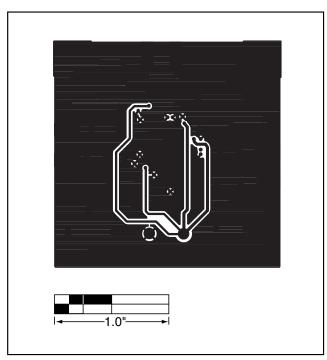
MAX9989/MAX9990 EV Kit PC Board Layout—Inner Layer 3 (Routes)
